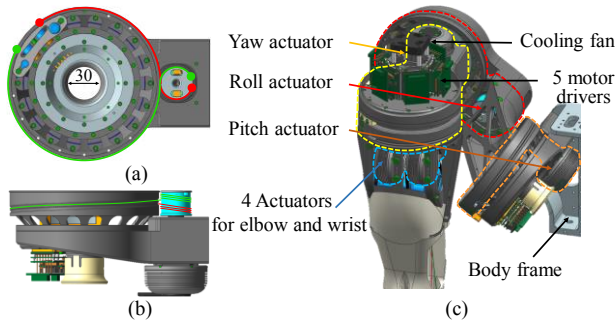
Shoulder mechanisms. (a) Top view and (b) front view of shoulder actuator, (c) 3-DOF shoulder composed of three identical joint mechanisms.
